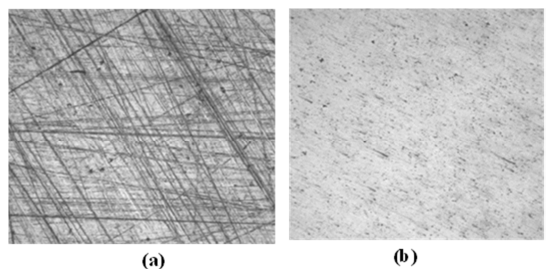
Optical Microscope Images of the Workpiece Surface for the Second Experiment a) before Polishing and b) after 30 min. Polishing.
